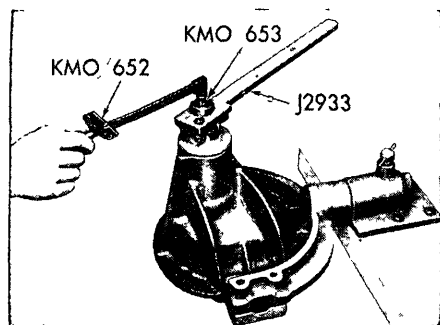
Measuring pinion bearing preload with torque wrench, 1947-52
